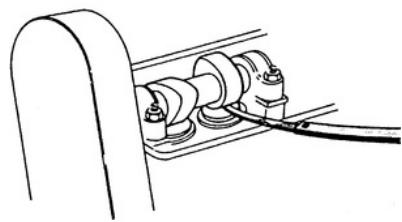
Line up the valve depressors — B230F and B230FT engines
